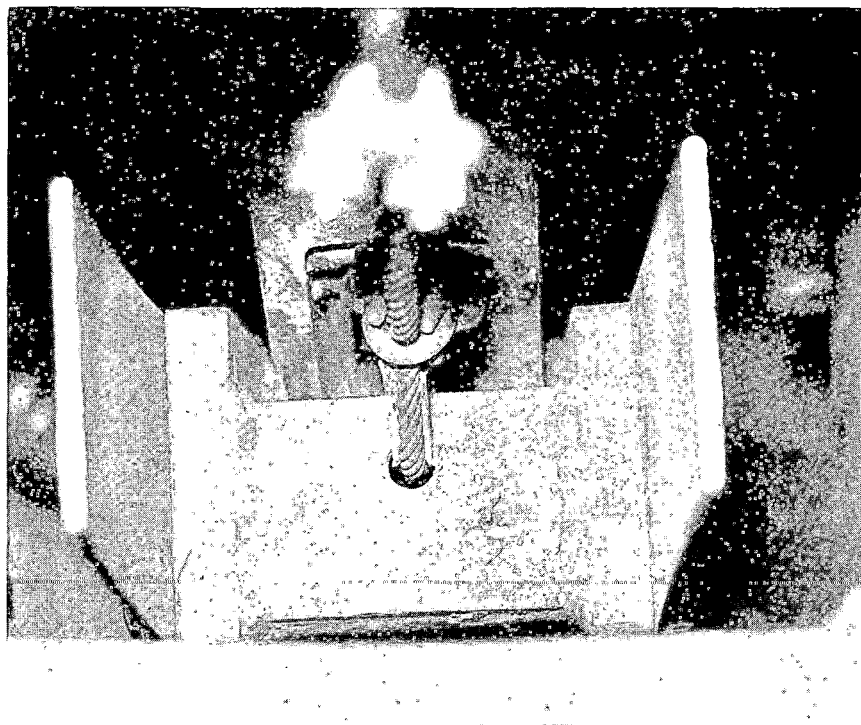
L-1 BRAKE HANGER; HANGER FACES AT FAILURE LINE.
